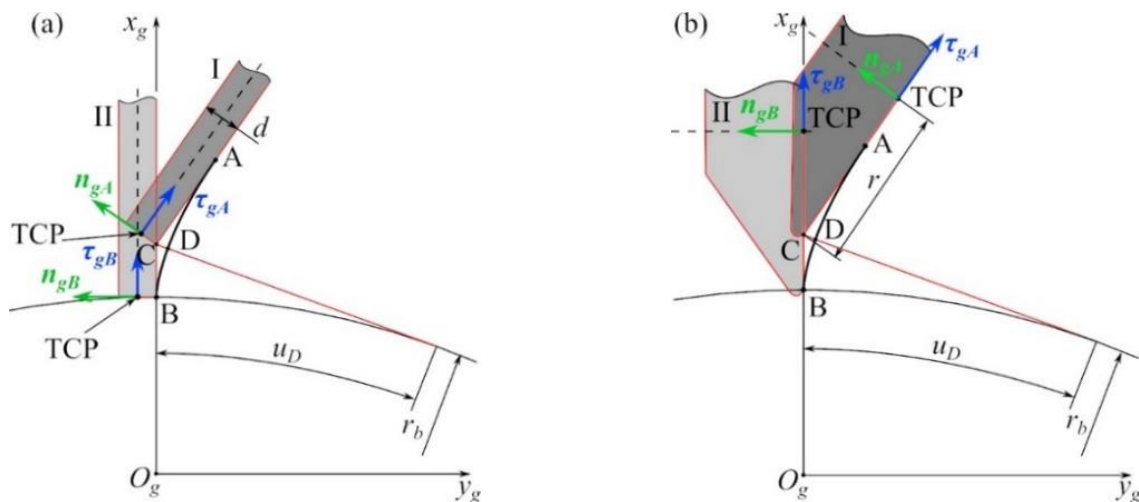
Machining system and positioning method: (a) for end milling cutter; (b) for disc milling cutter in five-axis machining of toothing
